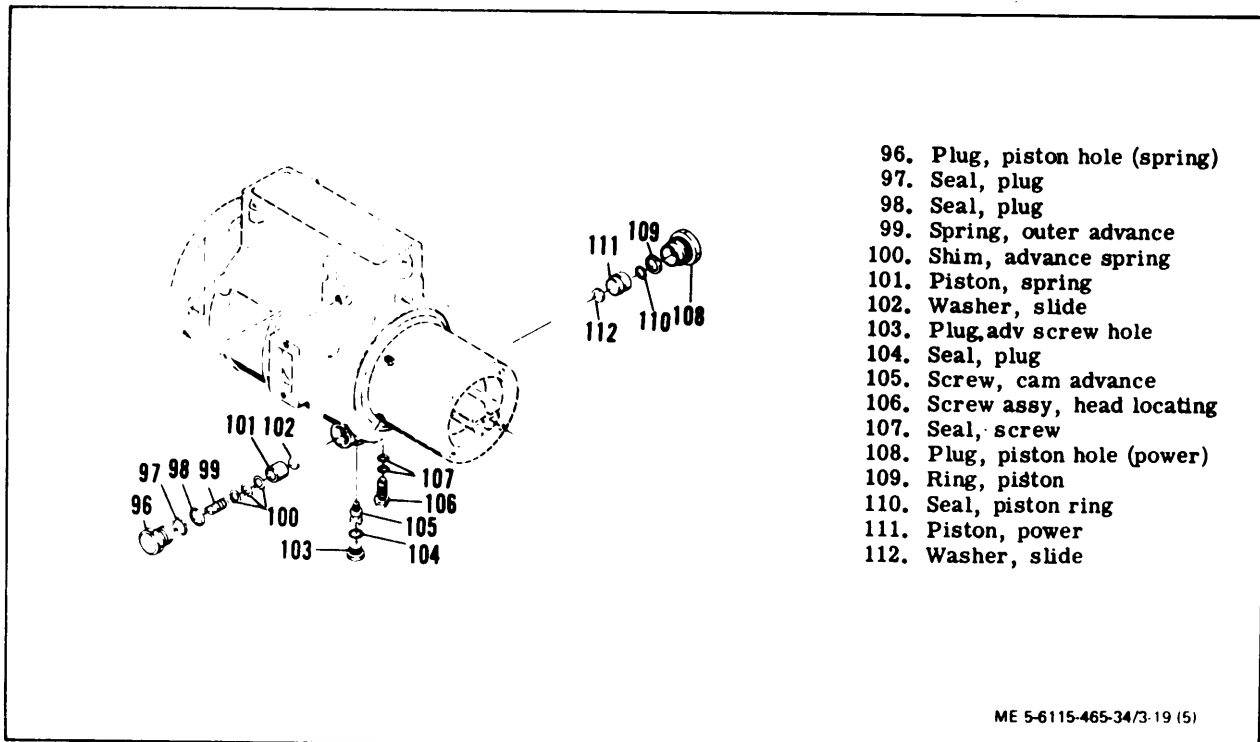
Fuel Injection Pump, Exploded View (Sheet 5 of 7)
